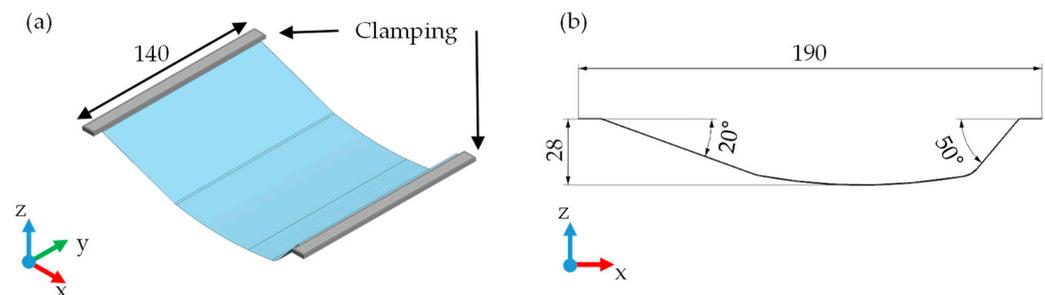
Schematic overview of the designed benchmark geometry: (a) ISO-view, (b) longitudinal section (units in mm).
